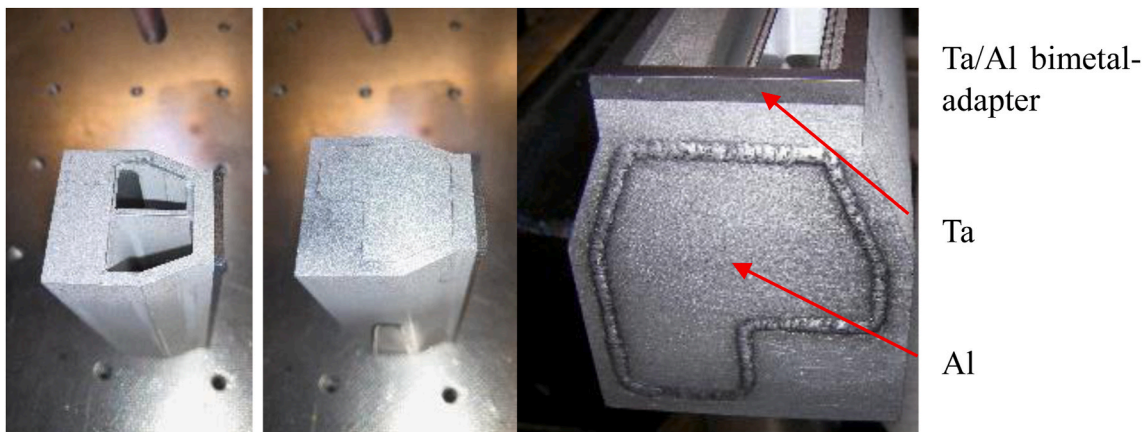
Ta/Al bimetal adapter; laser beam welding of coverings
